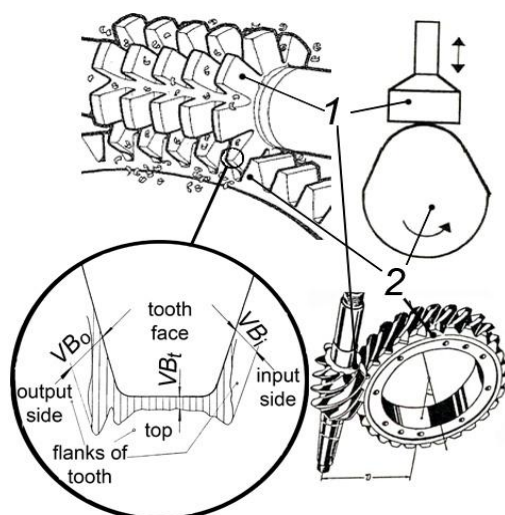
Example of tribo-mechanical systems with basic elements 1 and 2 and details with wear parameters of hob milling tool
